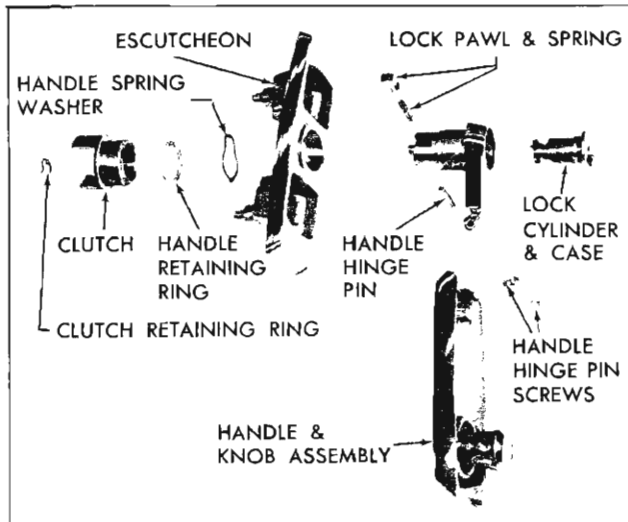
Tail Gate Window Regulator Outside Handle Assembly
